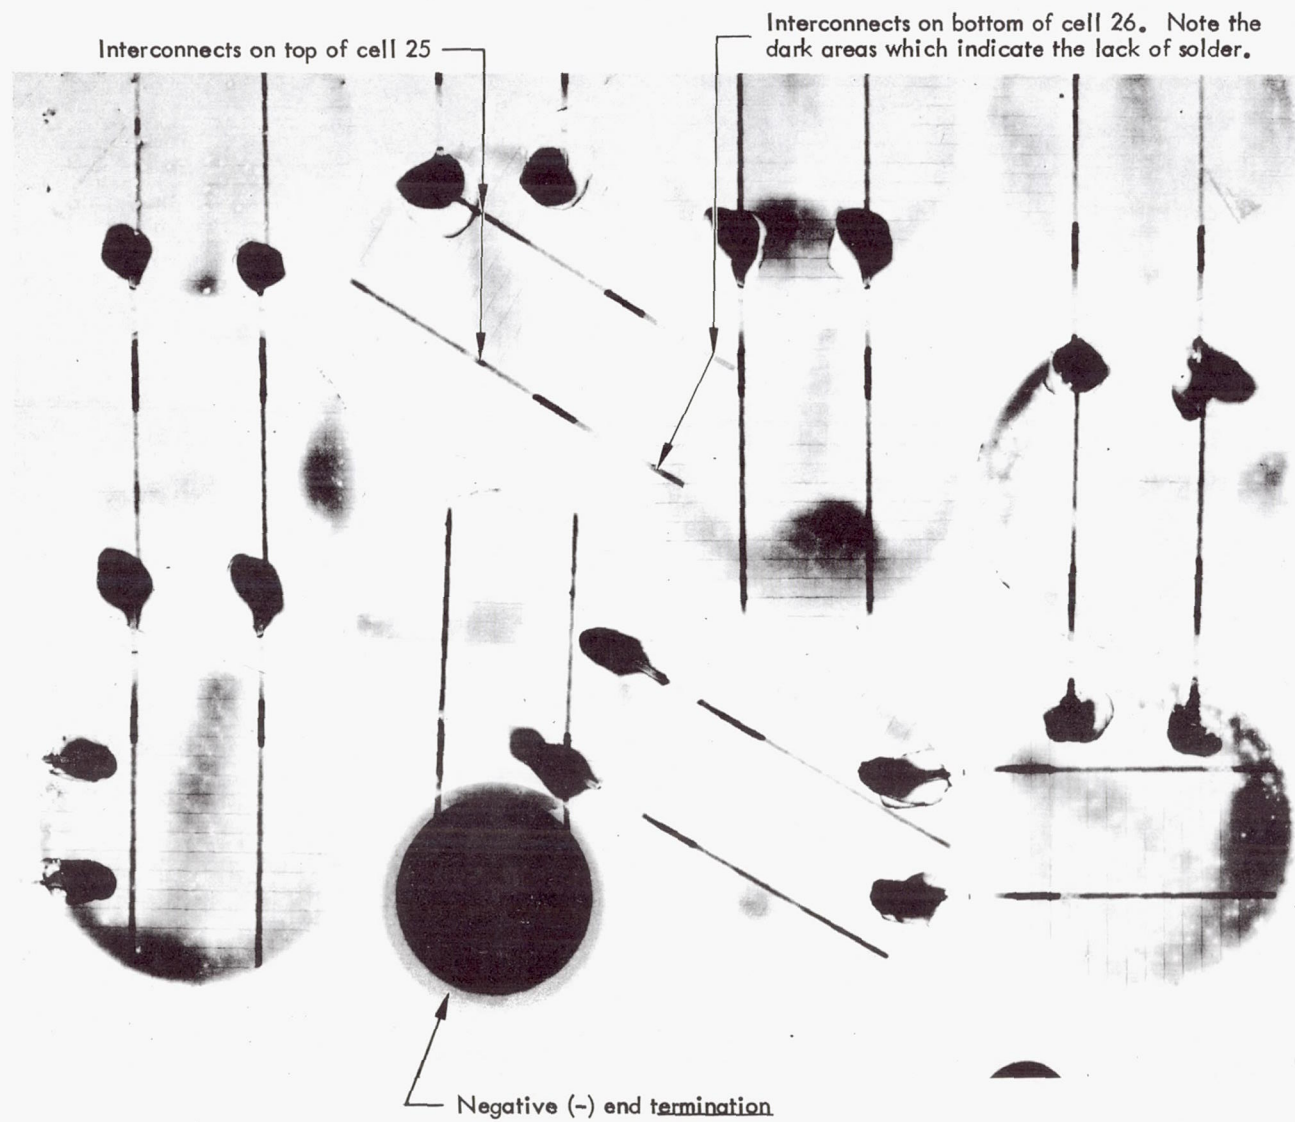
X-Ray Photograph of Manufacturer V Module
